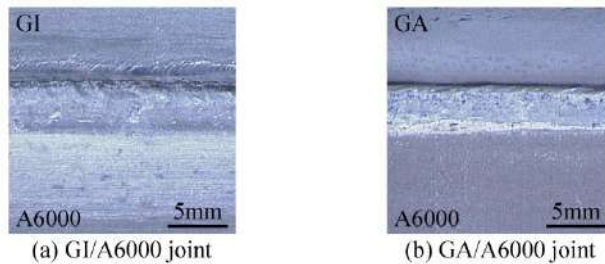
Bottom bead appearance of GI/A6000 and GA/A6000 Laser Roll Welded joints
